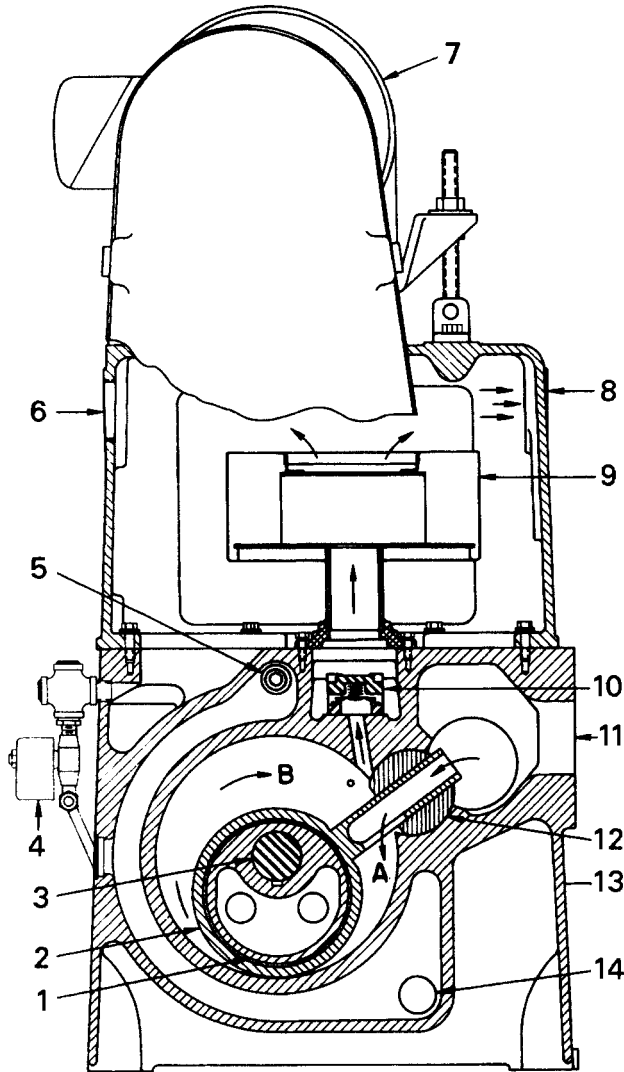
Sectional view of a Stokes 212H, 255-m³/h rotary piston pump: (1) eccentric, (2) piston, (3) shaft, (4) gas ballast, (5) cooling water inlet, (6) optional exhaust, (7) motor, (8) exhaust, (9) oil mist separator, (10) poppet valve, (11) inlet, (12) hinge bar, (13) casing, (14) cooling water outlet. Reprinted with permission from Stokes Division, Pennwalt Corp., Philadelphia, PA.
